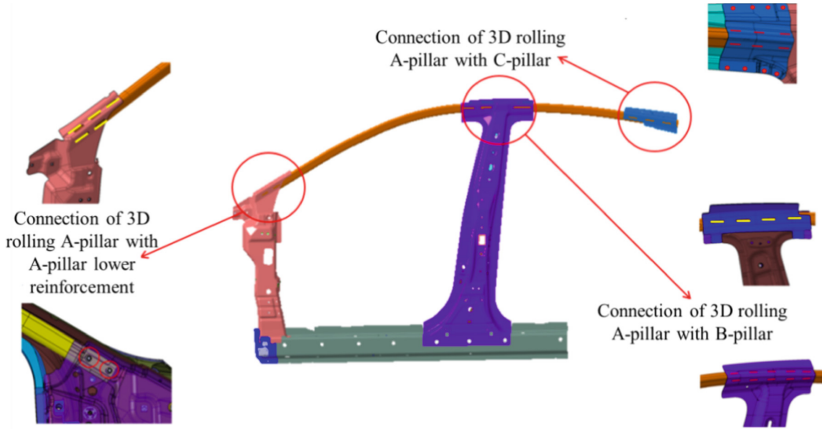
The connection process of 3D rolling A-pillar assembly.
